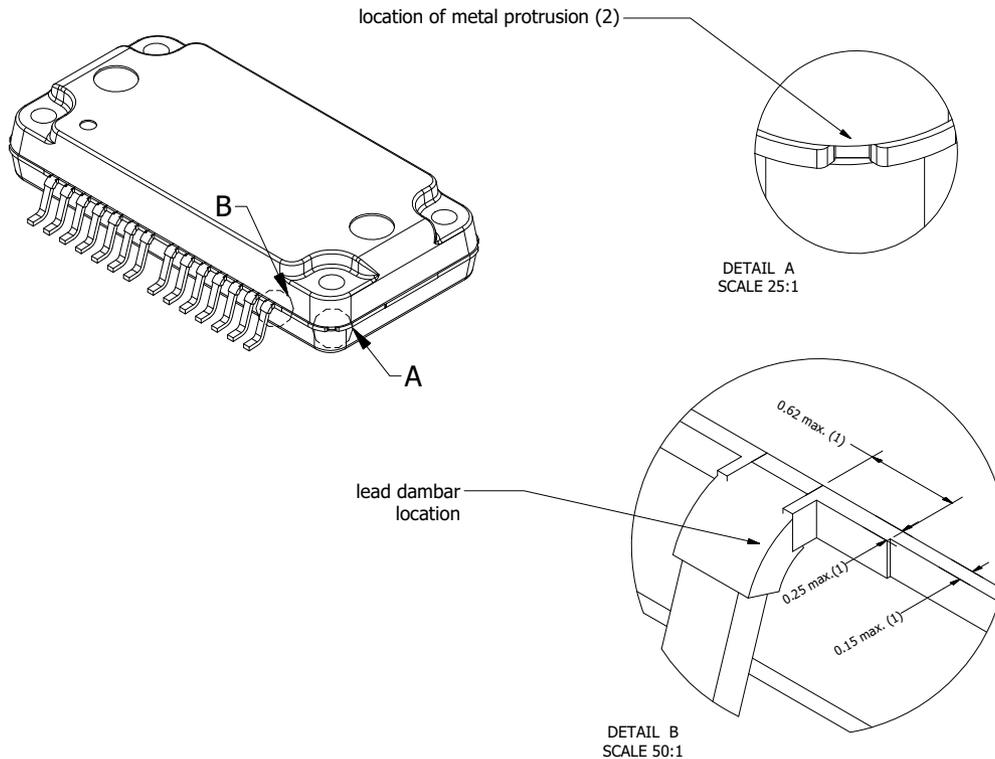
Package outline OMP-780-16G-1 (sheet 1 of 2)
